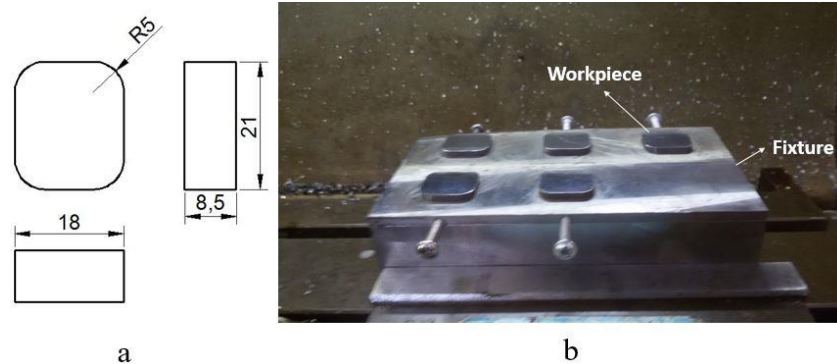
Test workpiece a) workpiece drawing, b) The workpieces mounted on the fixture
